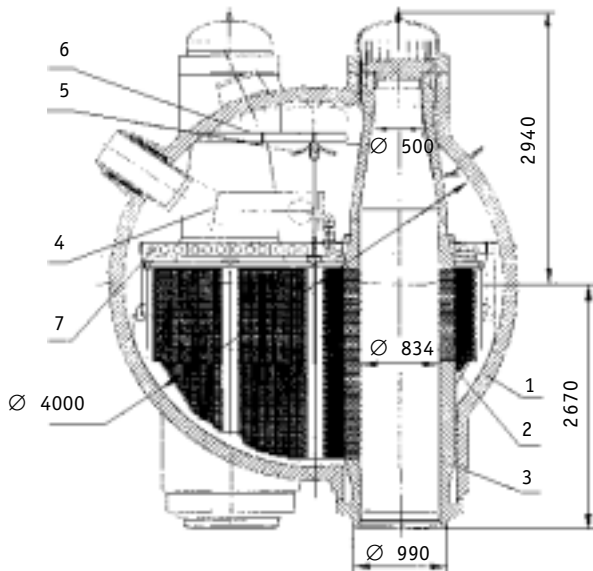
VVER-1000 - Steam Generator of PGV-1000 type cross section: 1-vessel, 2-tube packet, 3 - collector, 4 - feedwater inlet, 5-separator plates, 7-perforated plates
